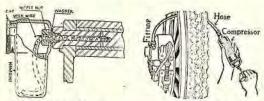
(left). Magazine or reservoir is attached to spring bolt, steering knuckle, or other chassis parts to be lubricated by means of a nipple-nut. Fill every 1,000 miles.
